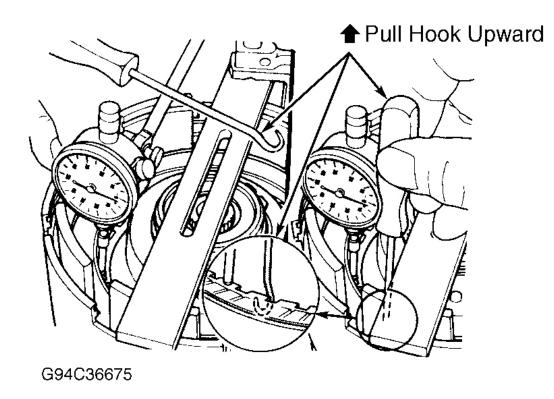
Checking Underdrive Clutch Clearance Courtesy of CHRYSLER LLC
